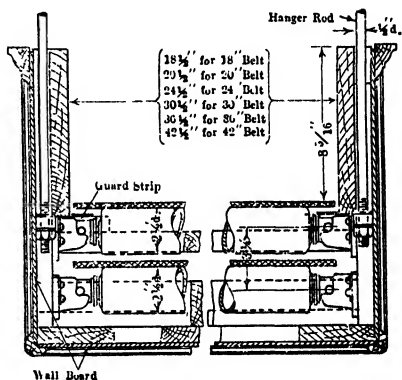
Package Conveyor, Panel Board Enclosure. Bronze Roll Bearings. (Lamson Company.)
